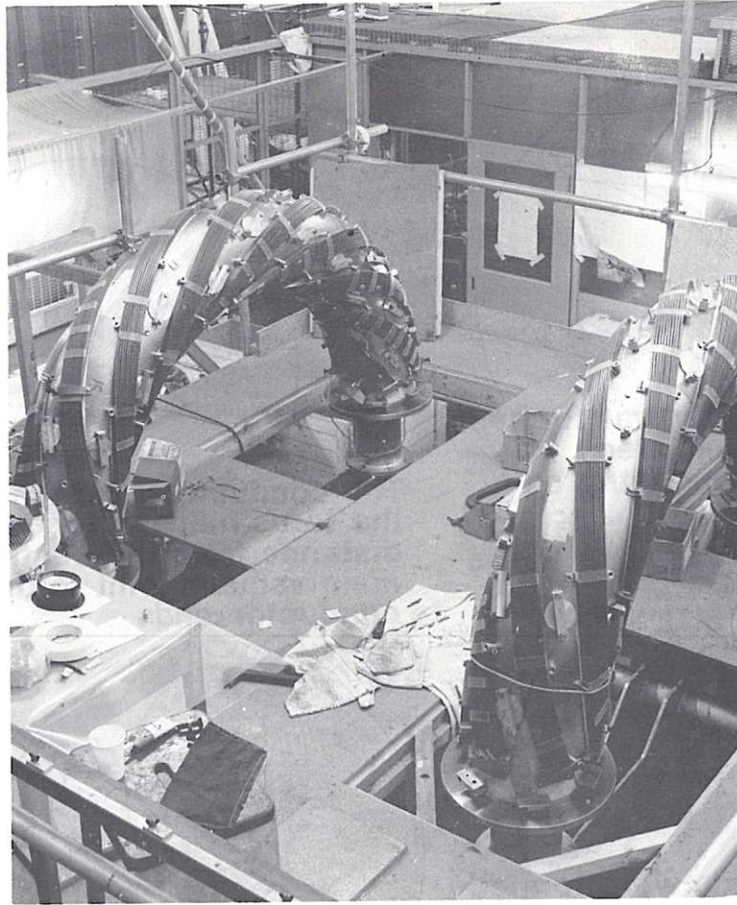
Trial fitting of helical winding conductors onto the stainless steel vacuum torus.
